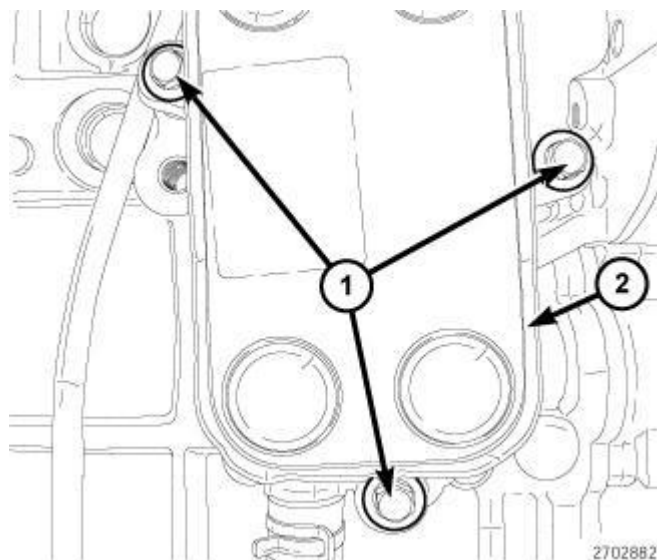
OIL FILTER HOUSING ADAPTER & BOLTS
